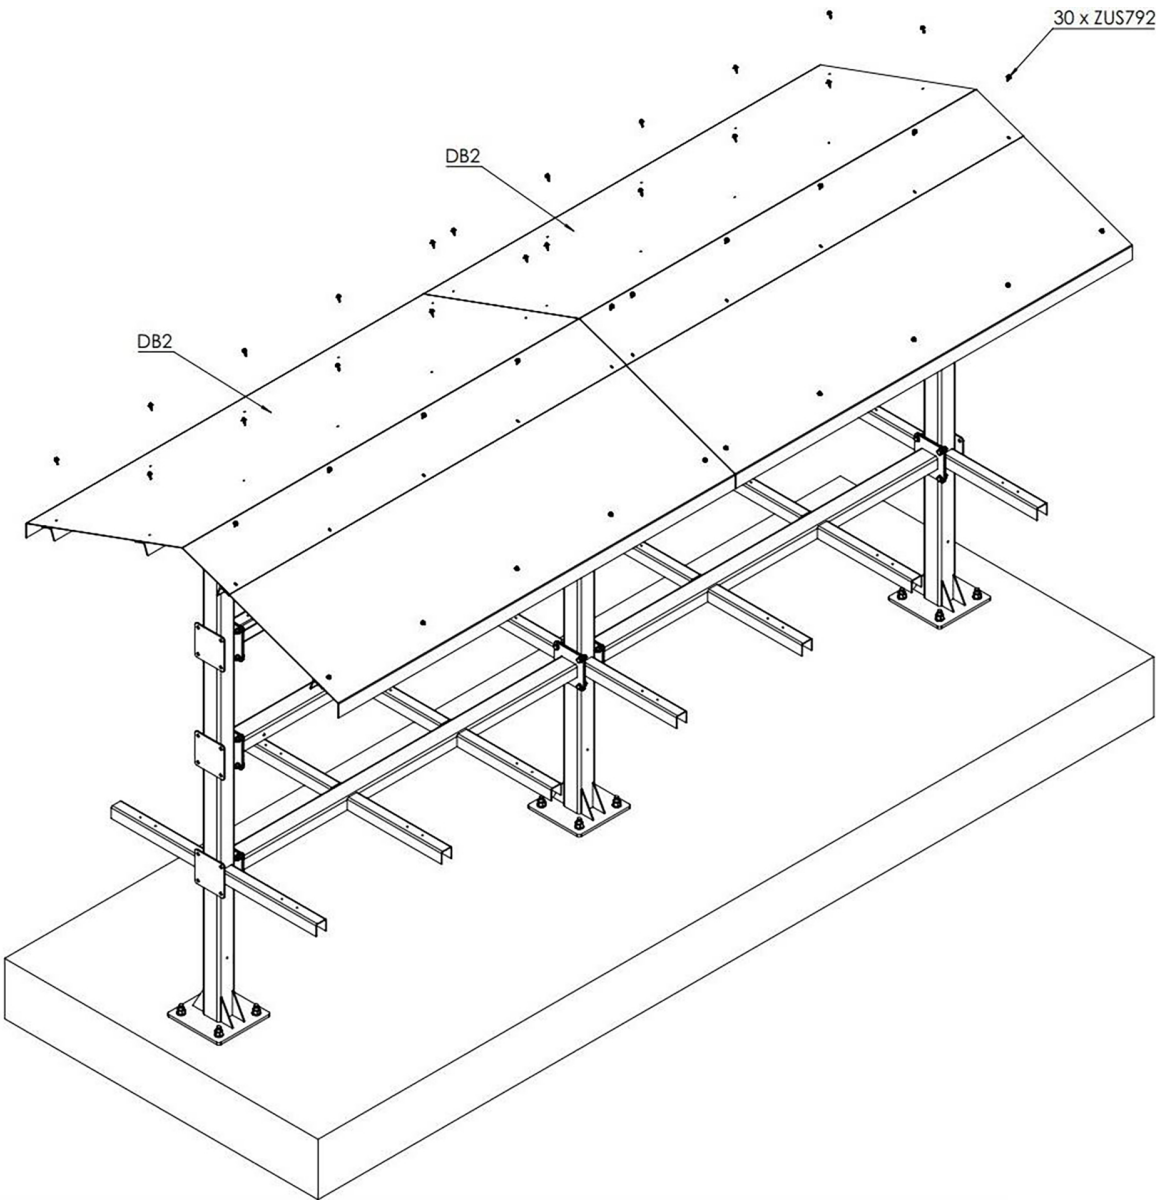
Assembly — Inverter rack — Sheet metal roofs DB2
